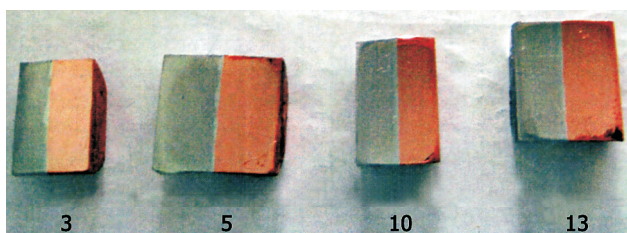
Welded samples of Al-Cu intended for hardness test
